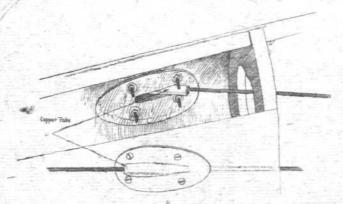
Guide tubes for the rudder and elevator control cables of the Pfalz biplane.
